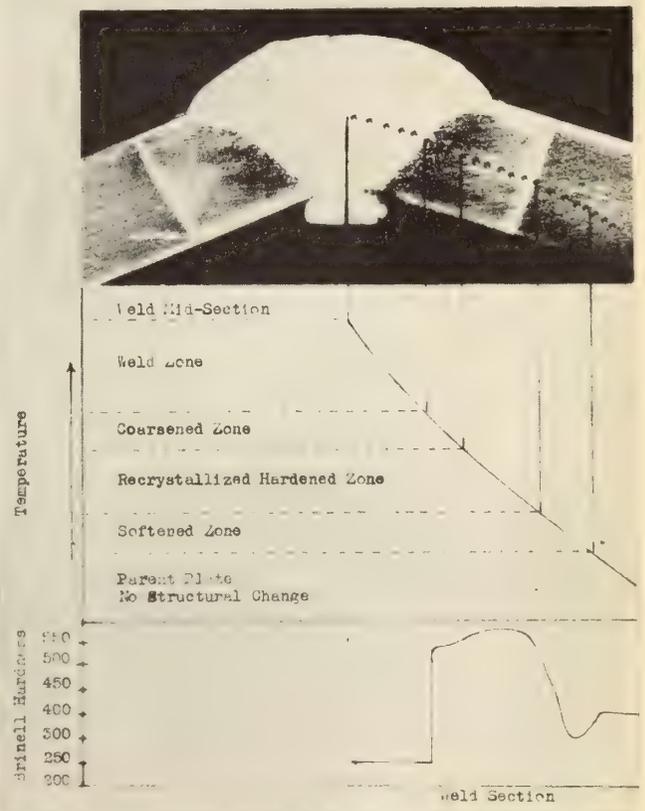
Weld section showing principal zones and hardness in adjacent armour plate.
